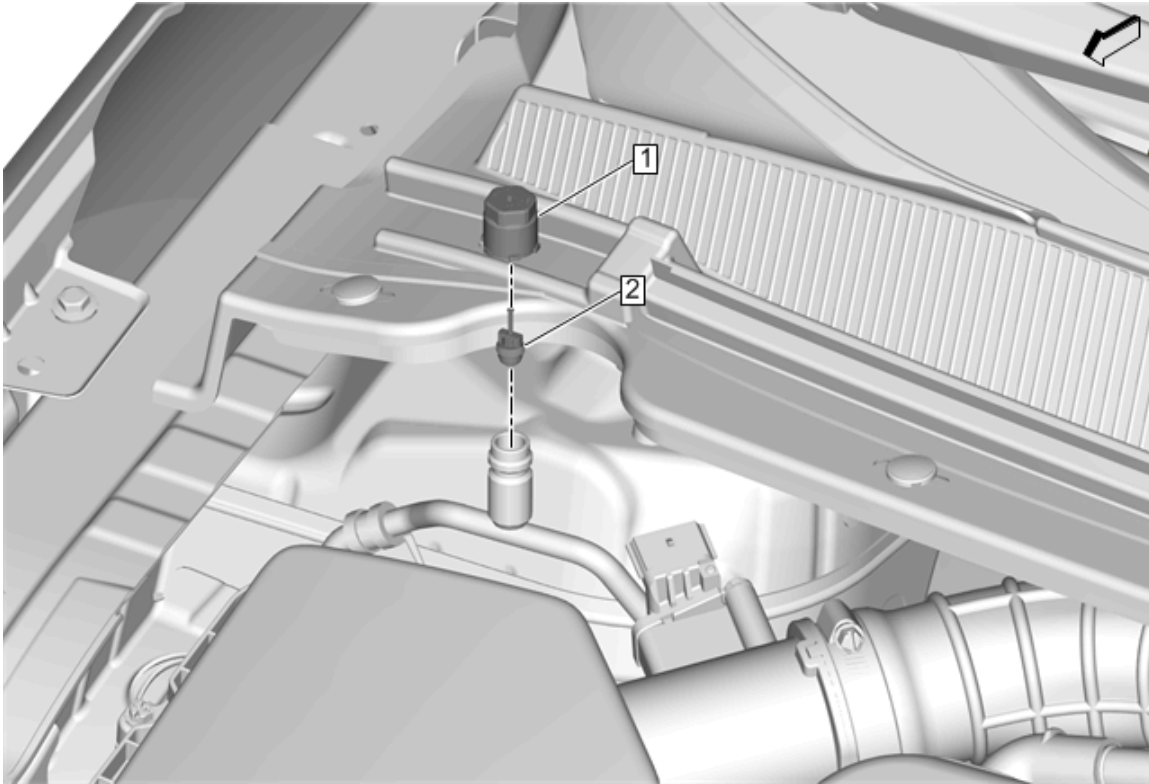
Air Conditioning Refrigerant High Pressure Service Valve
